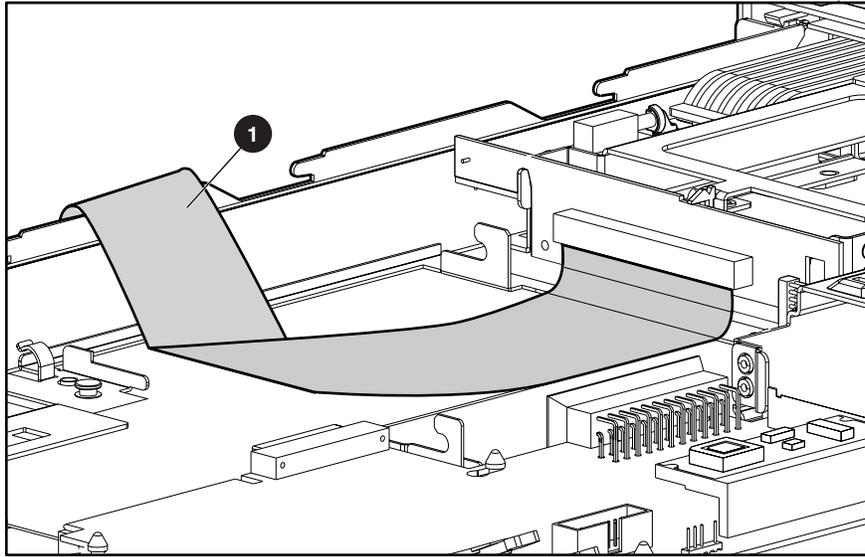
CD-ROM (DVD)/diskette drive assembly cable removed from routing sleeve
